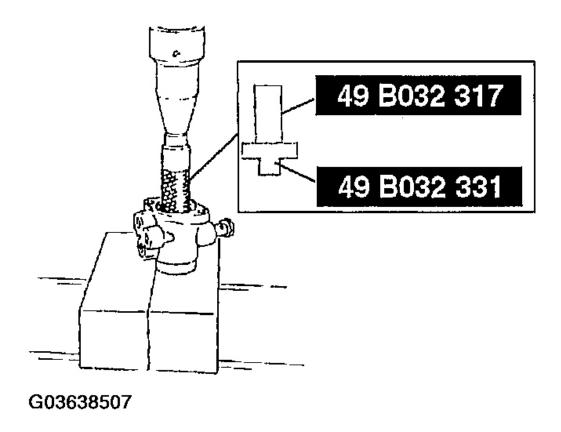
Pressing In Oil Seal Courtesy of MAZDA MOTORS CORP.
